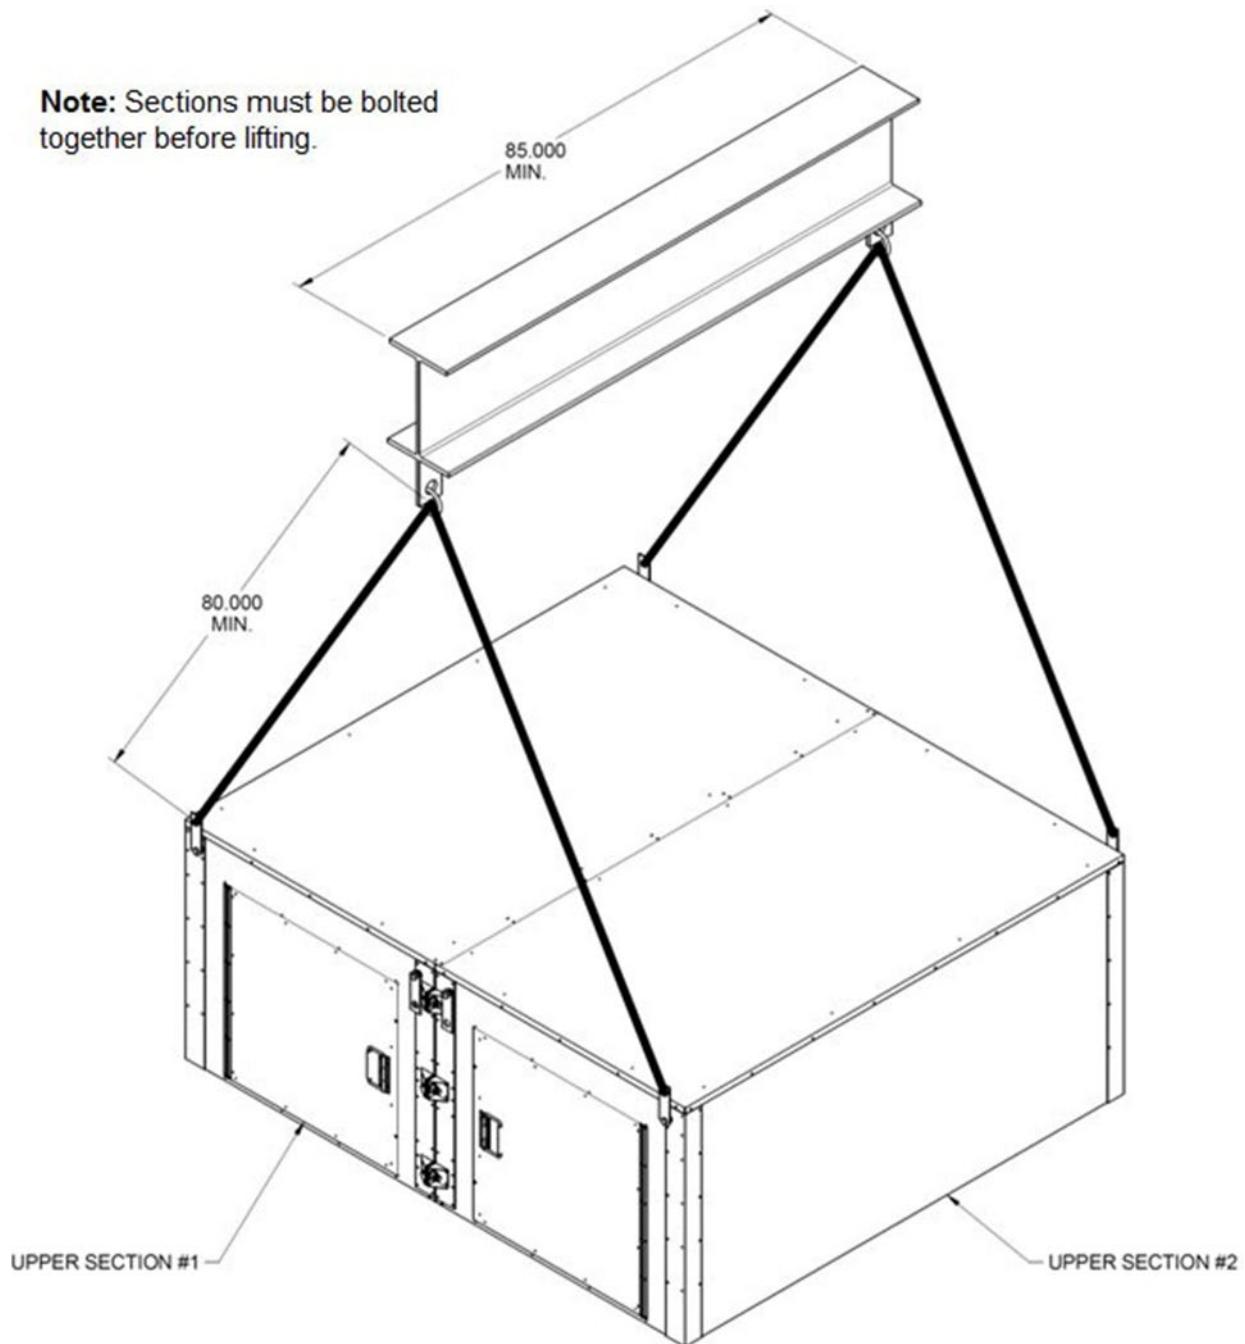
Two Piece Dual Unit Fan Section Lifting Details
